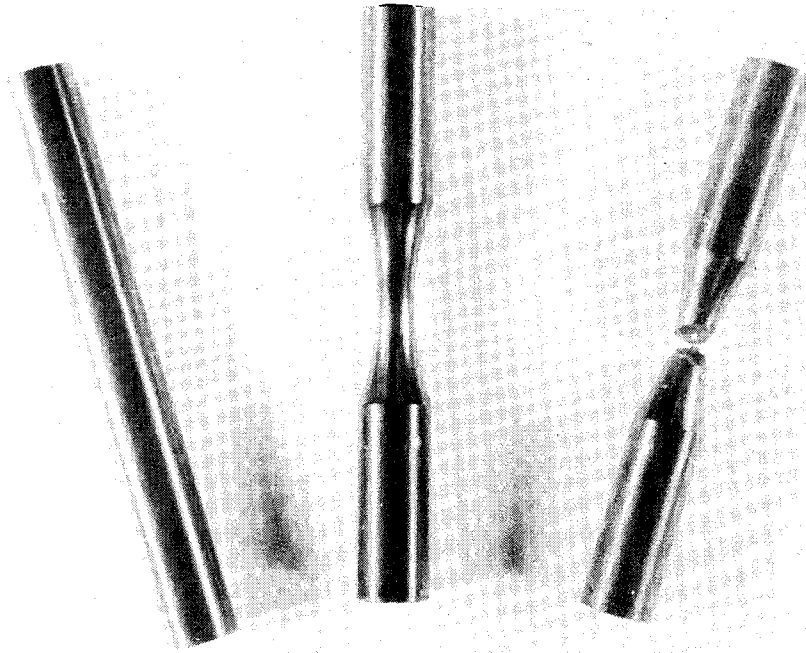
Photograph of Rotating Beam Specimen, Rod Blank and Fractured Specimen
